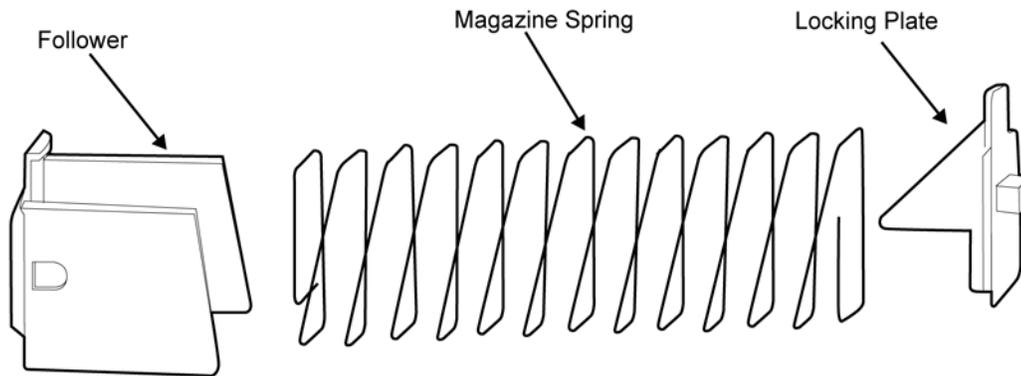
Follower, Magazine Spring, and Locking Plate Removed.
